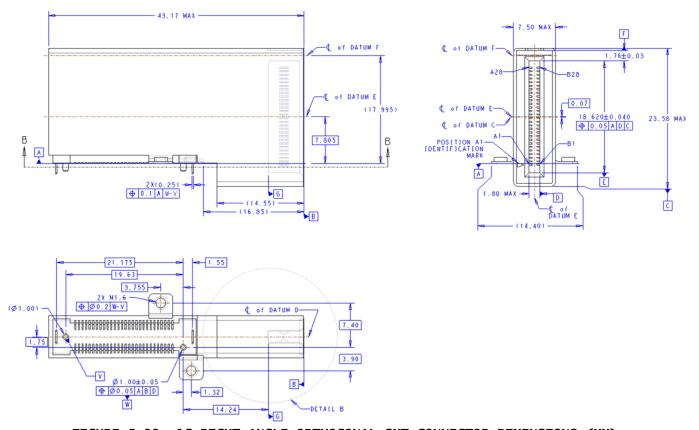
1C RIGHT ANGLE ORTHOGONAL SMT CONNECTOR DIMENSIONS (MM)
